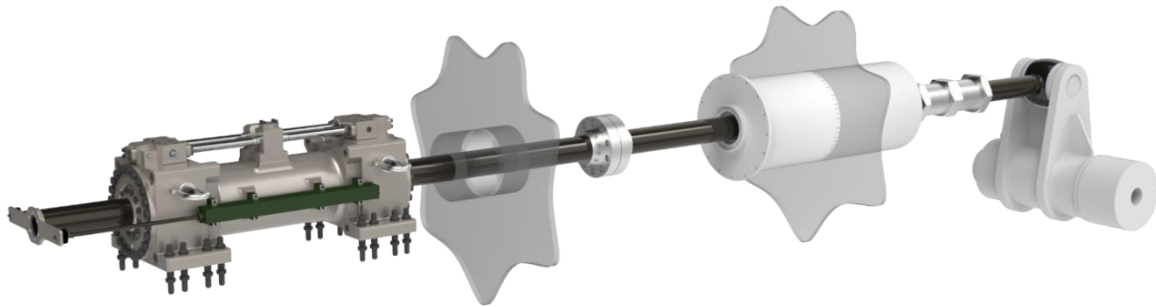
Control surface hydraulic linear actuator with two bulkhead penetrations
